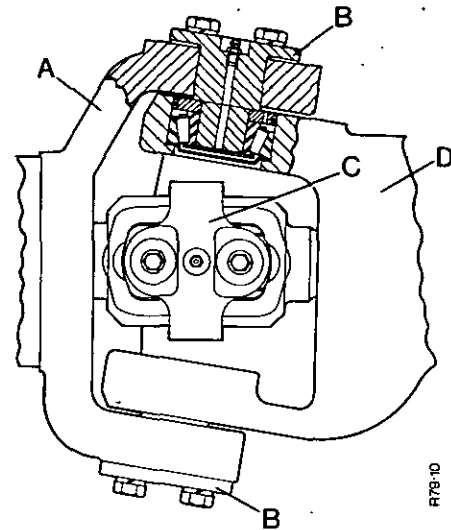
STUB AXLE AND UNIVERSAL JOINT
